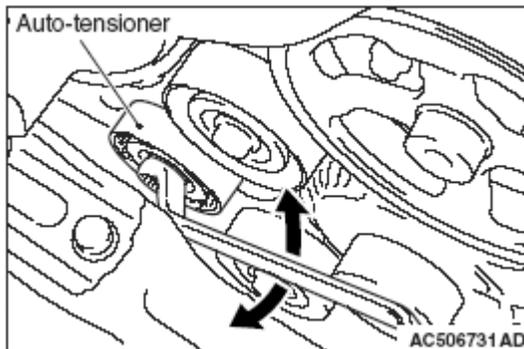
Rotating Pulley Bolt Of Auto-Tensioner Counterclockwise
